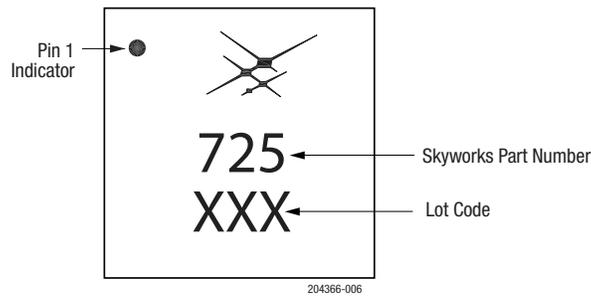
SKY65725-81 Typical Part Marking (Top View)
